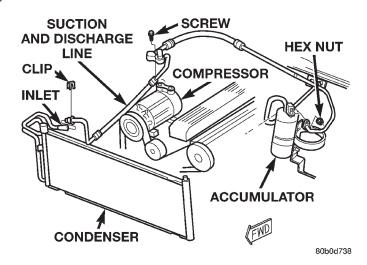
Suction and Discharge Line Remove/Install - Right-Hand Drive 2.5L Engine
